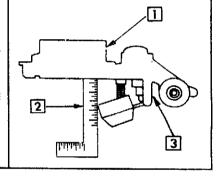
FIG. C FLOAT ASSEMBLY DETAIL VIEW
